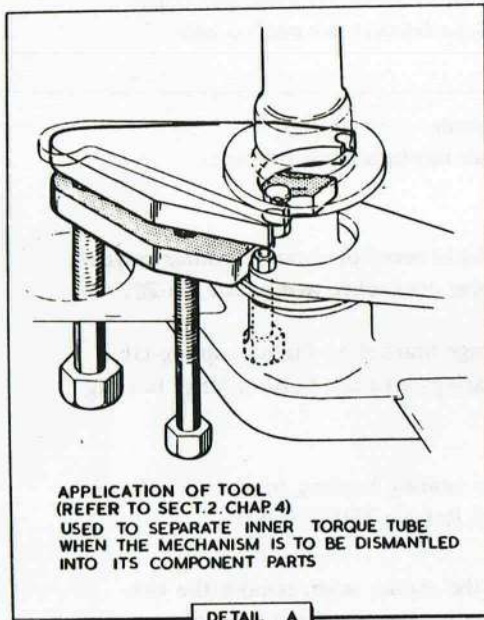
RUDDER SPRING-TAB MECHANISM REMOVAL
